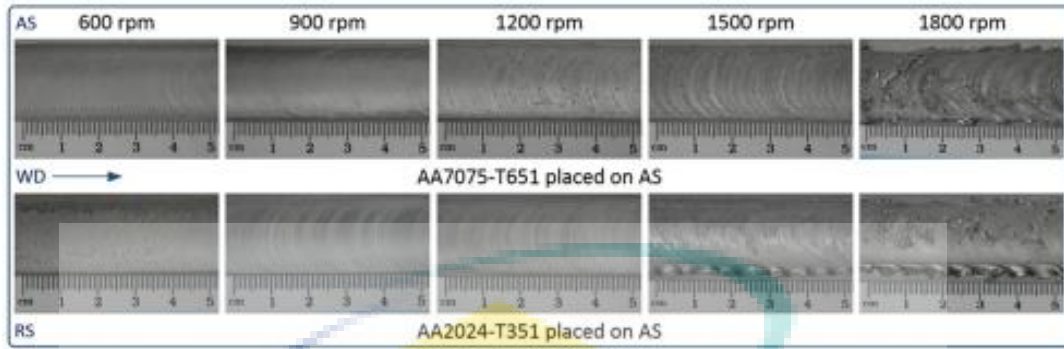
Surface finish of the resulting welds at different tool rotation speeds and materials position. WD welding direction, AS advancing side, RS retreating side
